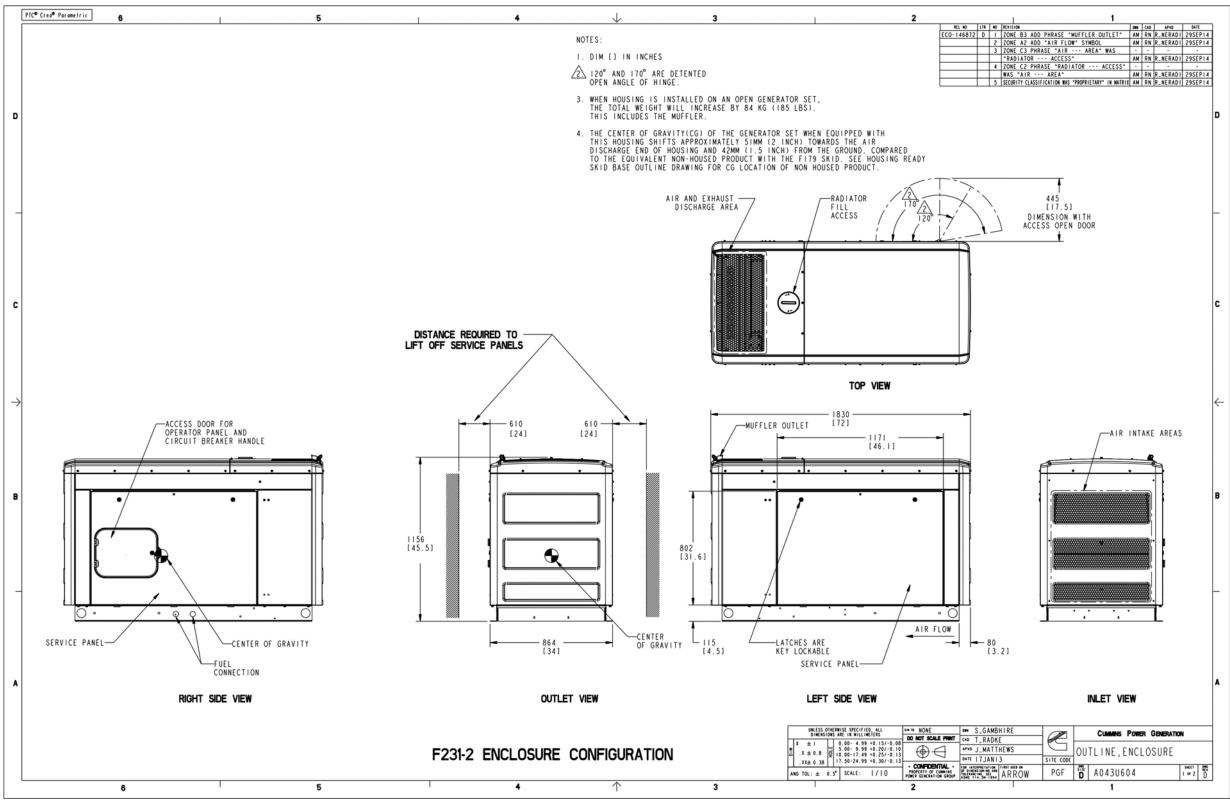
ENCLOSURE OUTLINE, 20-25 KW 1800 RPM, 30 KW 3600 RPM (SHEET 1 OF 2)
